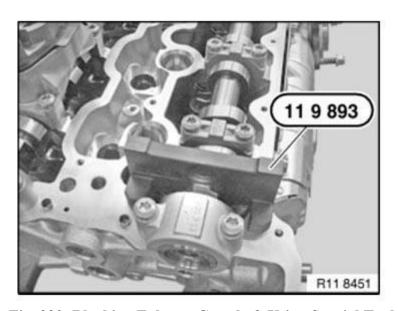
Blocking Exhaust Camshaft Using Special Tool 11 9 893 Courtesy of BMW OF NORTH AMERICA, INC.
